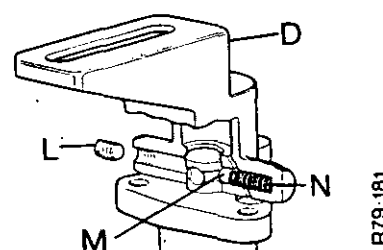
ASSEMBLY OF THE THREE-WAY VALVE
